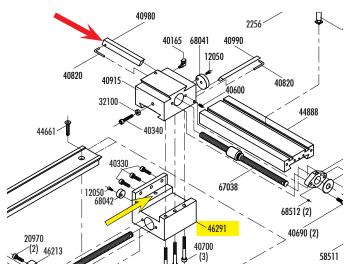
Exploded view of the Ball Screw Lathe saddle. The red arrow is pointing to the end of the X-axis gib. The yellow arrow is pointing to the gib set screw access hole on P/N 46291.
